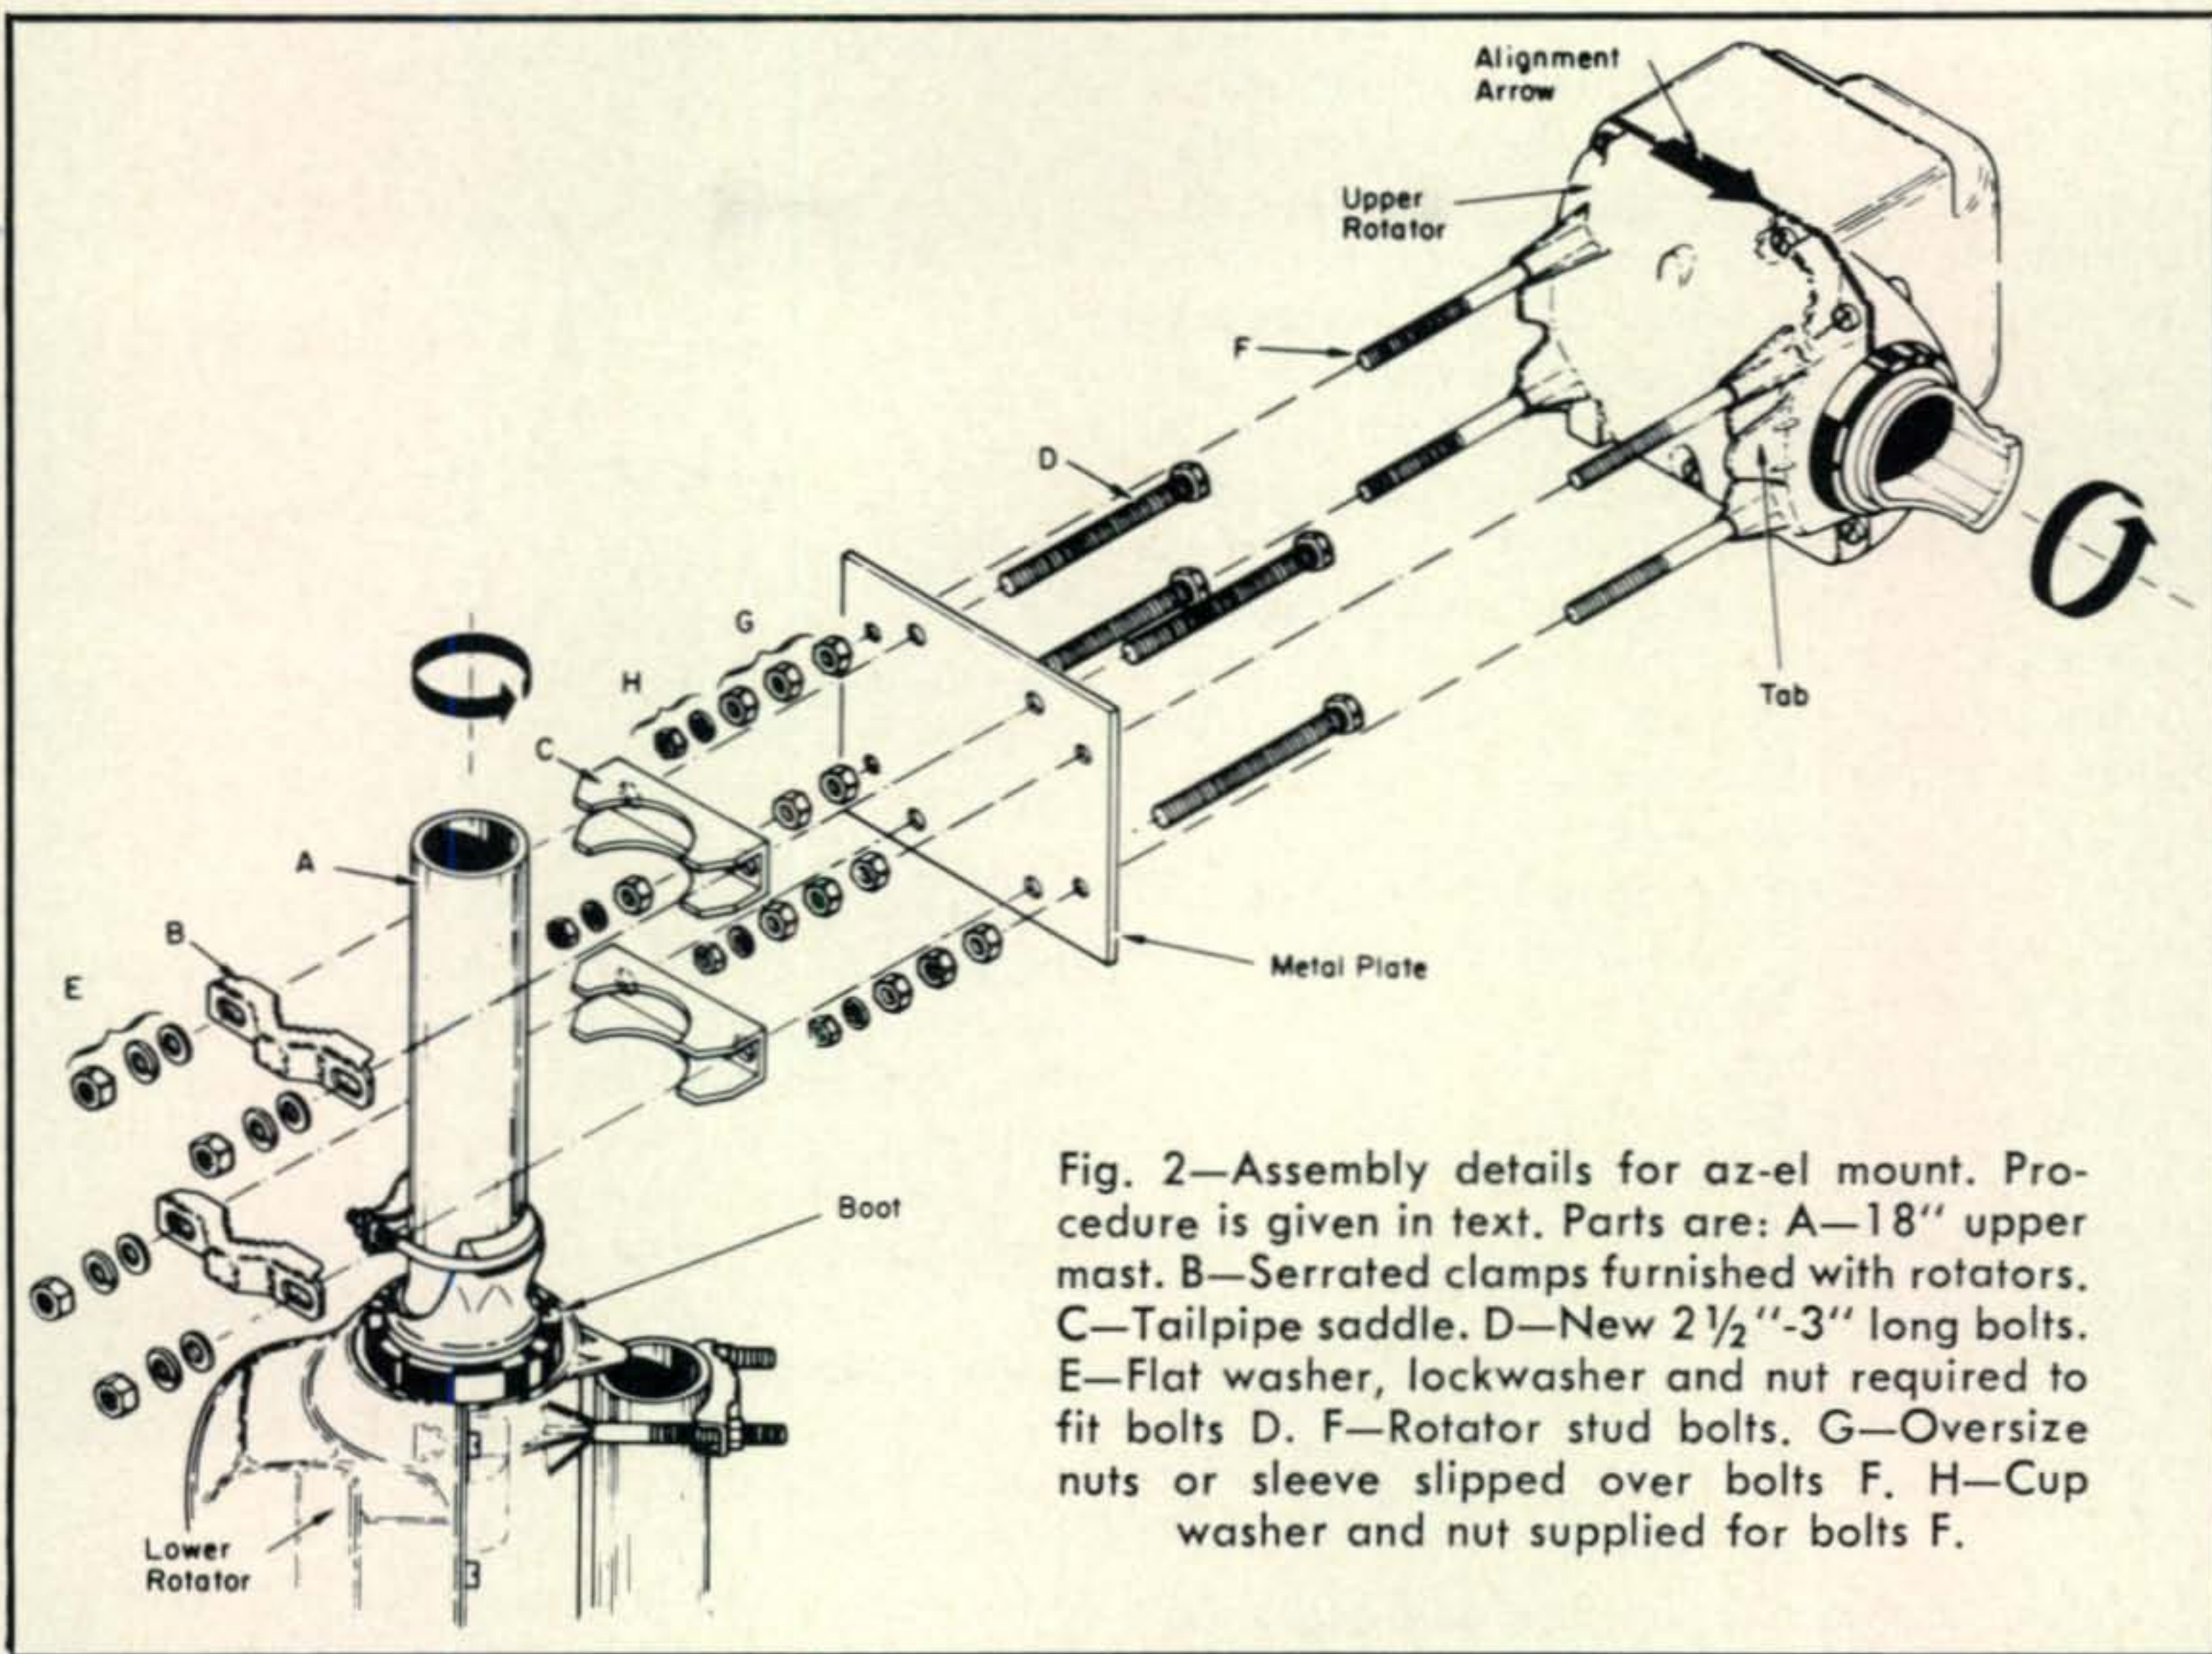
Assembly details for az-el mount. Procedure is given in text. Parts are: A—18" upper mast. B—Serrated clamps furnished with rotators. C—Tailpipe saddle. D—New 2 1/2"-3" long bolts. E—Flat washer, lockwasher and nut required to fit bolts D. F—Rotator stud bolts. G—Oversize nuts or sleeve slipped over bolts F. H—Cup washer and nut supplied for bolts F.
